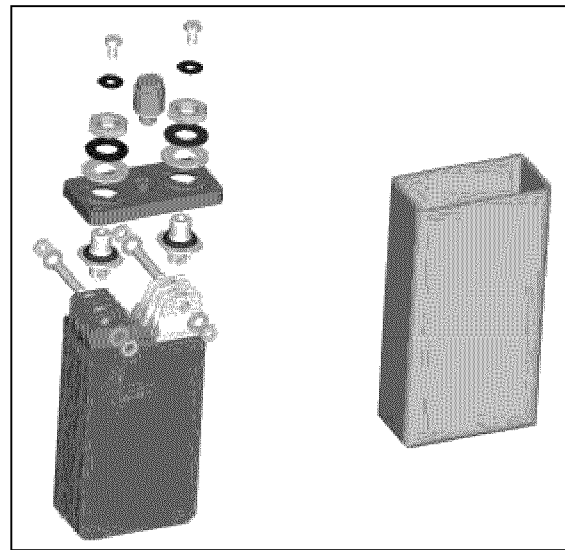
Exploded View of a Ni-MH Cell Showing Assembly Detail
